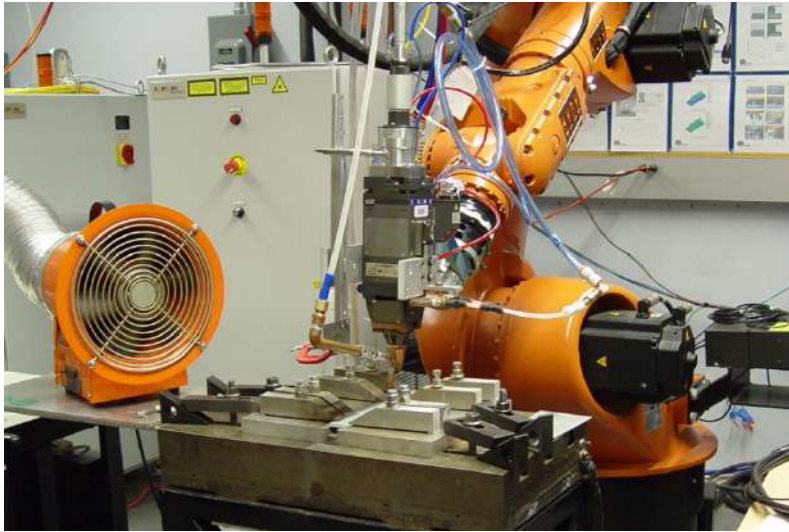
Experimental setup for low power / low speed laser welding
